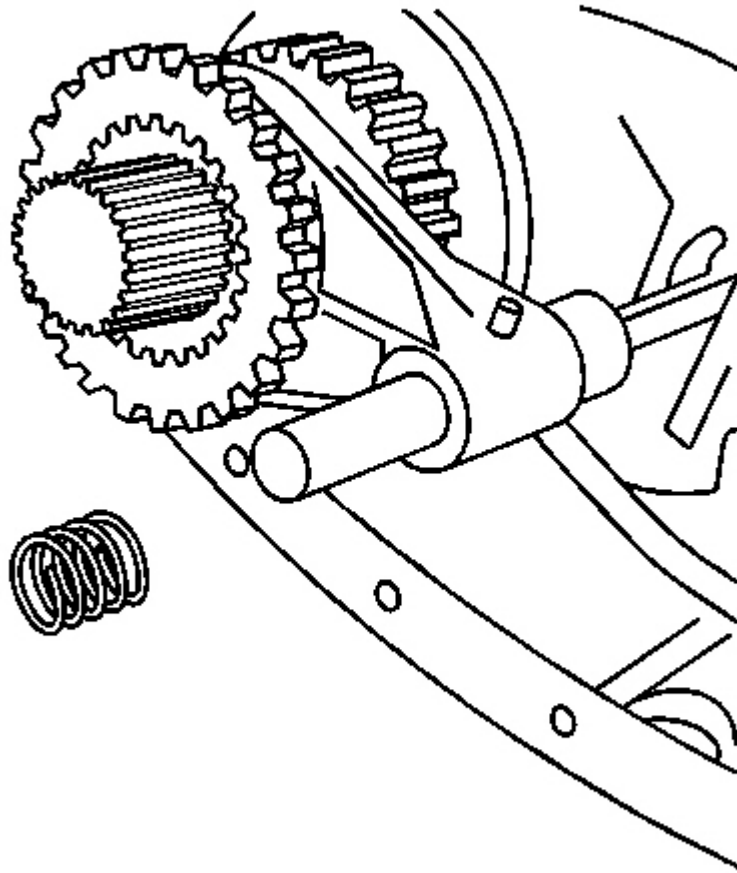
Installing The Bottom Retaining Ring On To The Shift Fork Shaft
